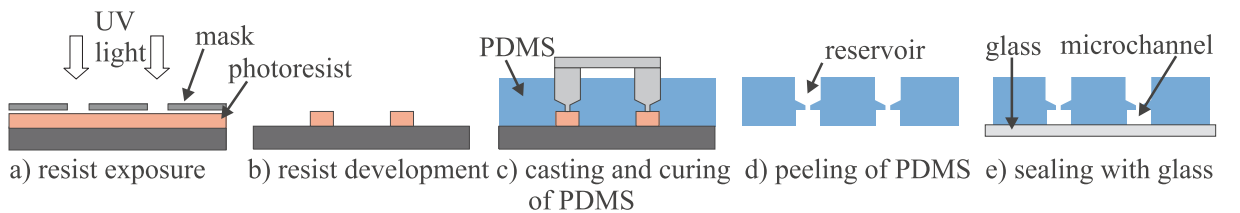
Fabrication of microfluidic channels by a PDMS molding technique. With a custom-made metal tool, fluid reservoirs are incorporated during the casting step (c).
